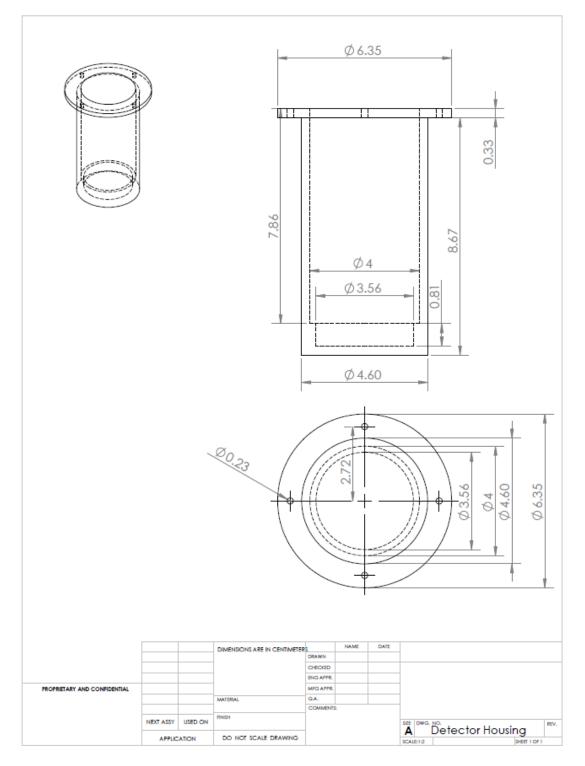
Mechanical drawing of detector housing with dimensions in centimeters. This housing attaches to the top plate (Fig. A4).
